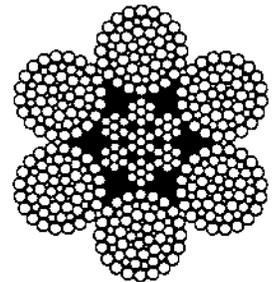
6 x 61 Filler Wire Warrington Seale IWRC
